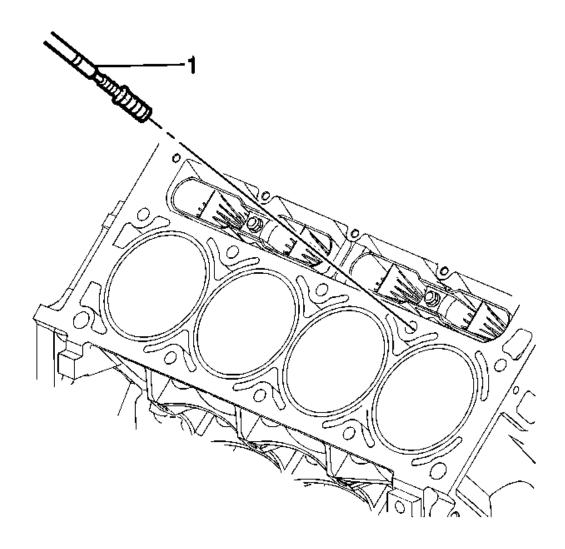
Installing Insert & Driver Into Cylinder Bolt Hole Courtesy of GENERAL MOTORS CORP.
